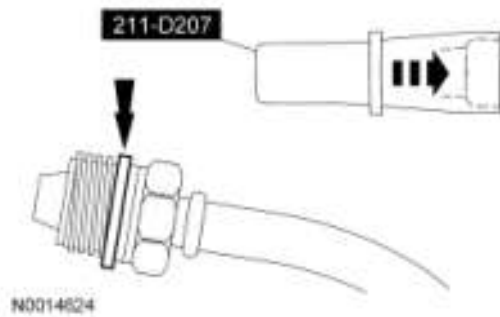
Locating O-Ring Seal On Pressure Line Fitting
